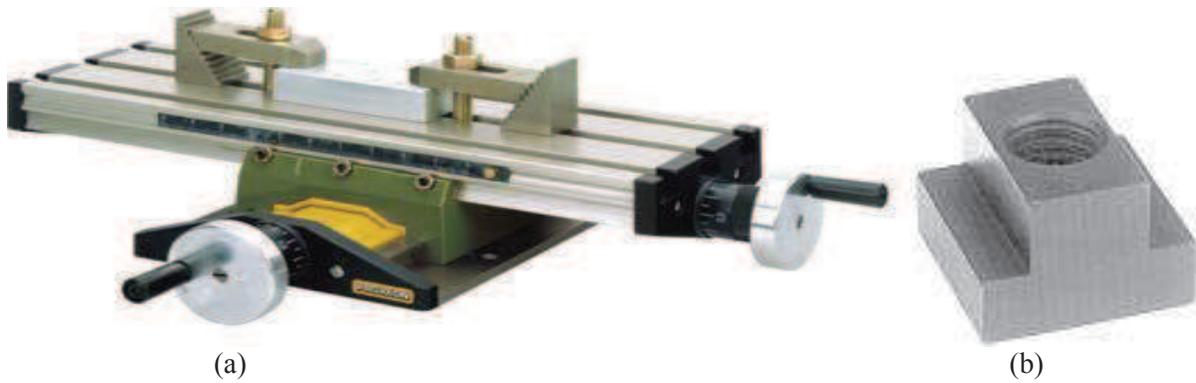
(a) Milling table with T-slots. Source: MTI Corp. “Milling table” [Online]. Available: <http://mtixtl.com/mt-115precisionmicrodrillingmachineupto8000rpmwithtwo0018diamonddrills.aspx>
